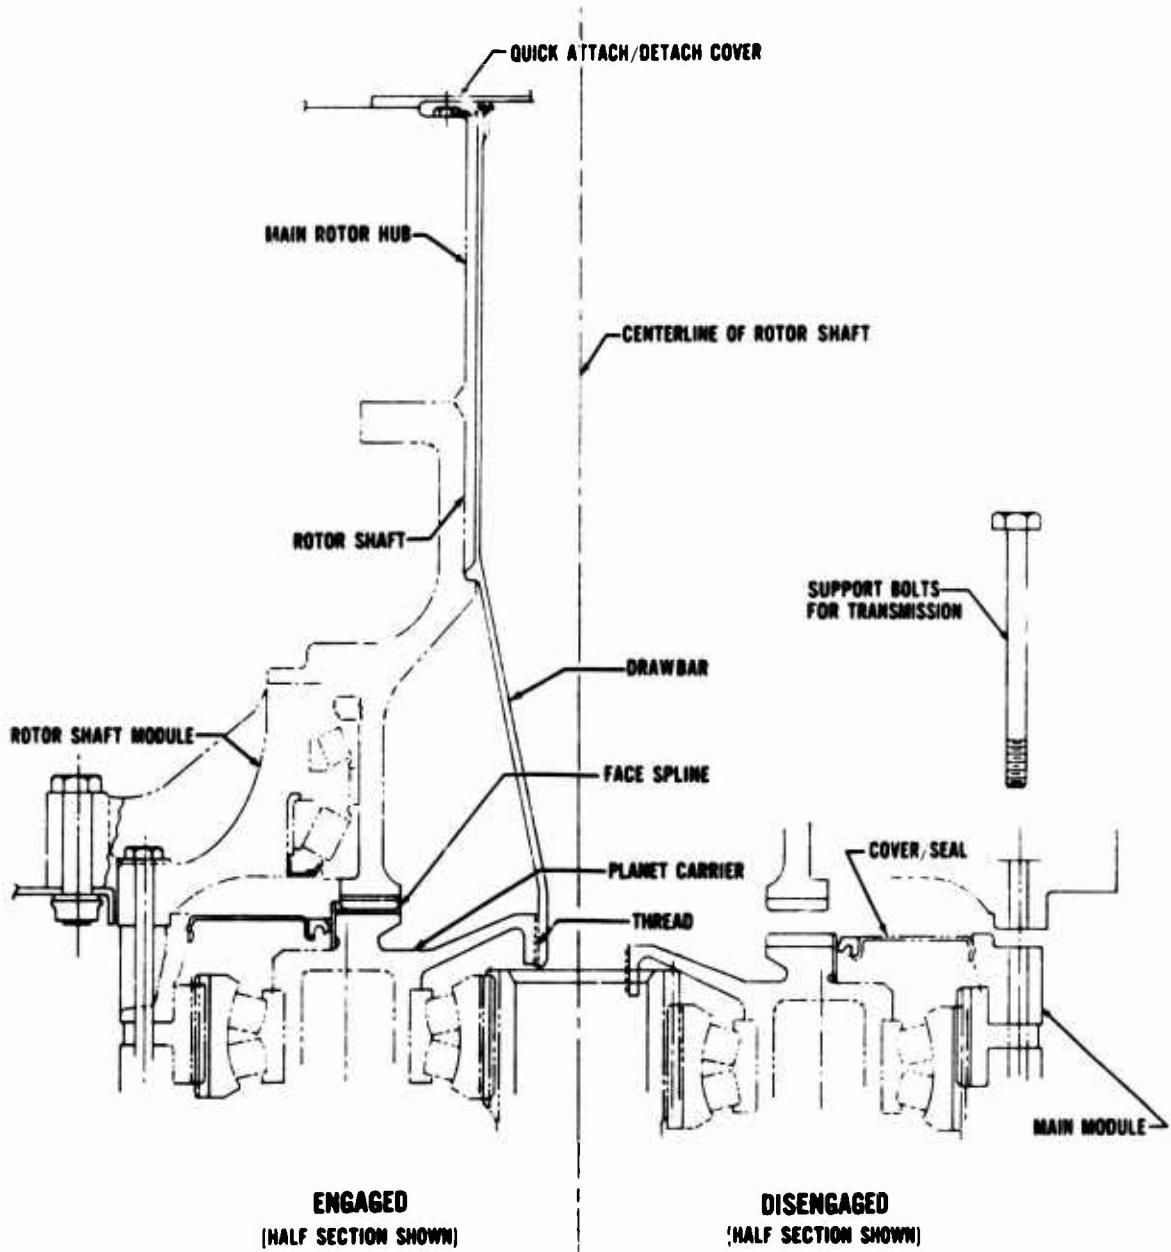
Sectional View Through Rotor Shaft of Modularized Main Transmission.
